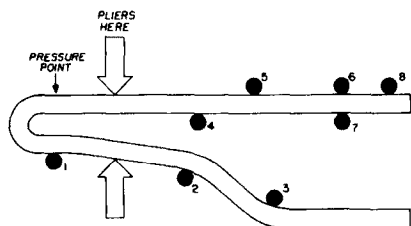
Jig layout for making soldering tips for Weller soldering guns.
